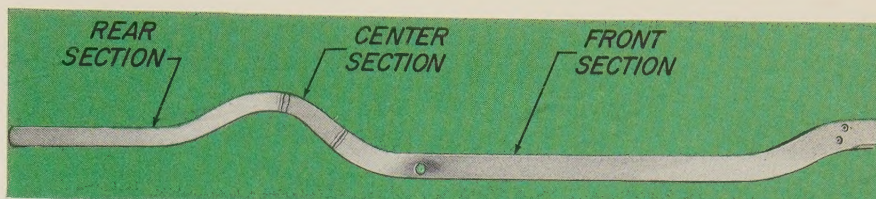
The rectangular side rails of the 1955 Chevrolet passenger car frame are composed of three individual sections resistance flash welded together.
